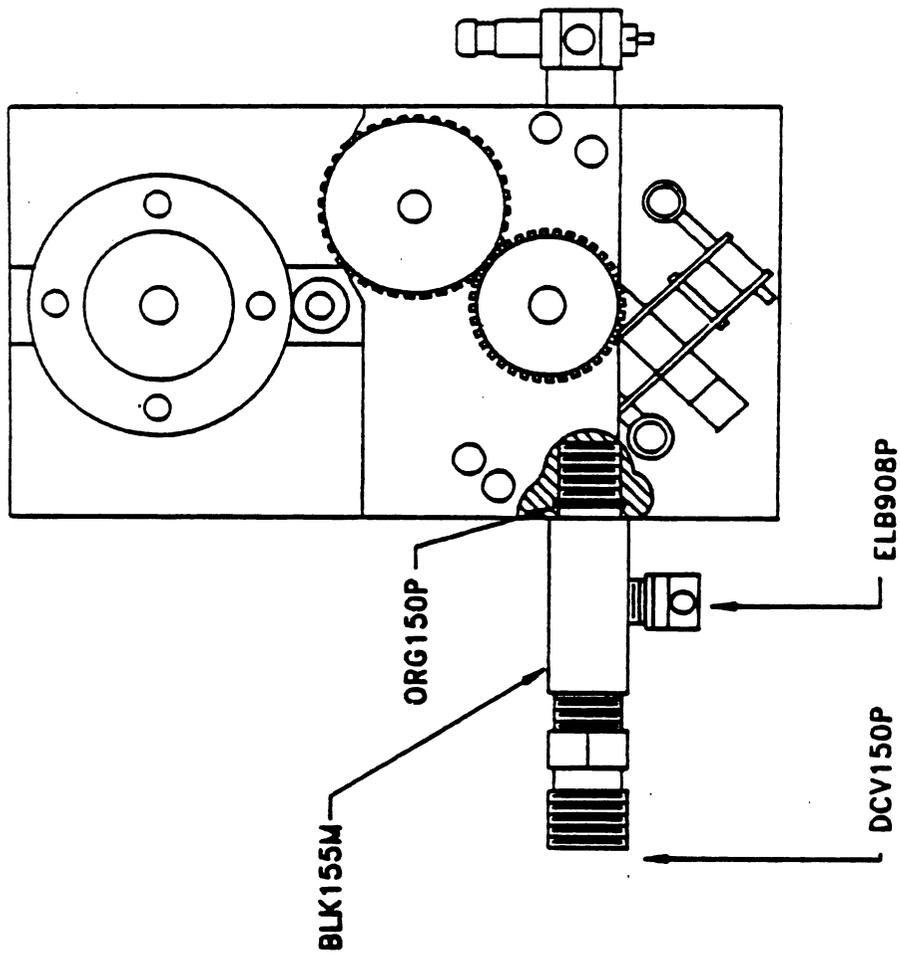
Mixer Auxiliary Flow Outlet Assembly
